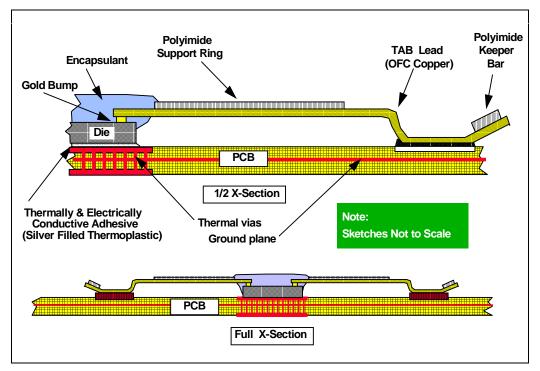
Cross-Sectional View of the Mounted TCP Package
